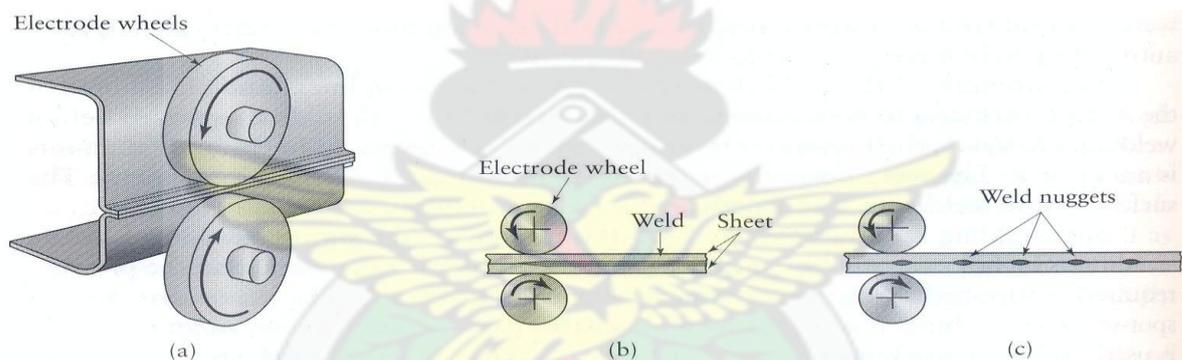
(a) Resistance seam welding process with rolls acting as electrodes. (b) Overlapping spots in seam welds. (c) Roll spot welds. (Kalpakjian and Schmid, 2008).
